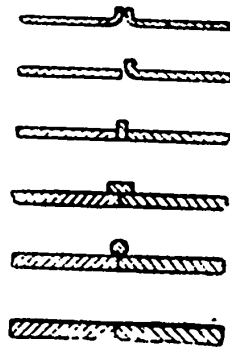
Sketches Showing Seams Prepared for Arc-Welding
